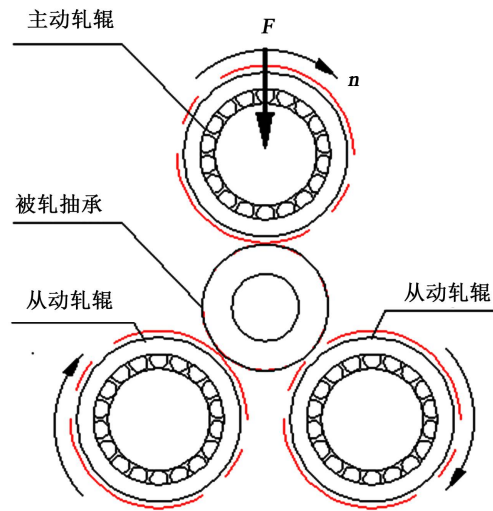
The clearance process of three-roll-type rolling self-lubricating spherical bearing
